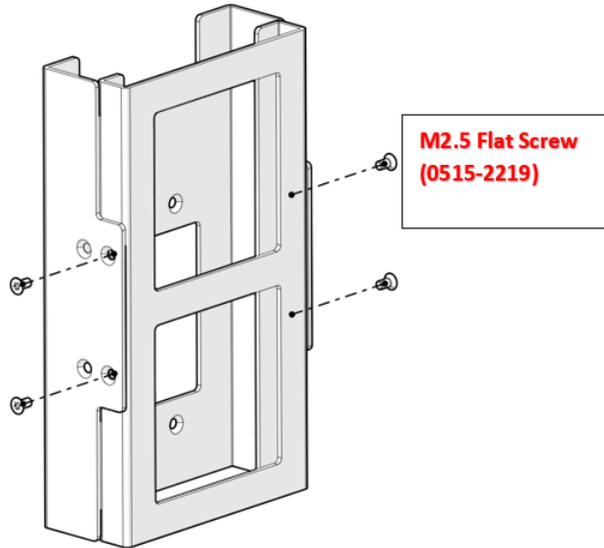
Adjustable mounting holes for E3. L and E3. L 2T devices
